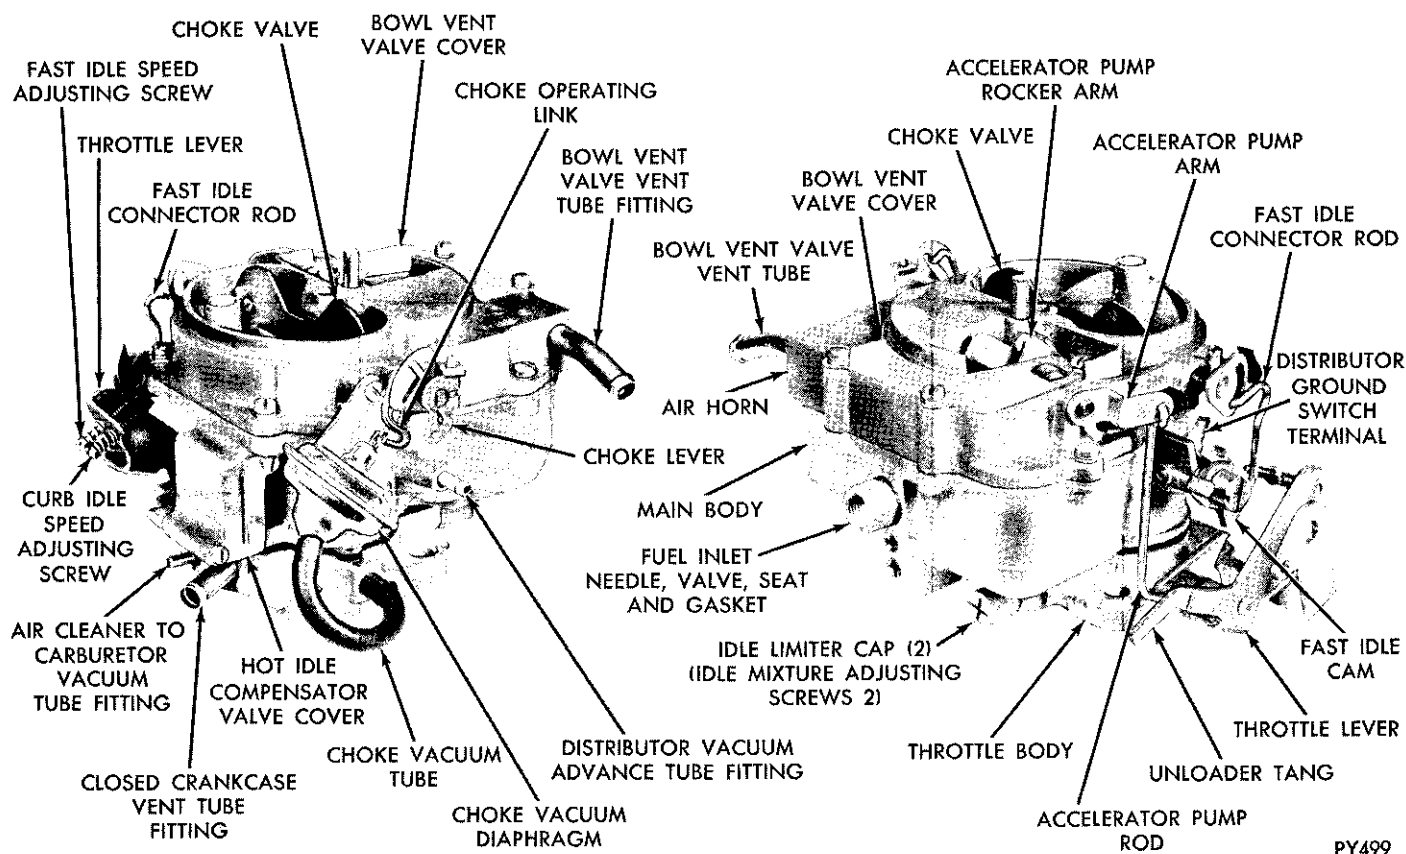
Carburetor Assembly (BBD 1-1/2 inch) E.C.S.
